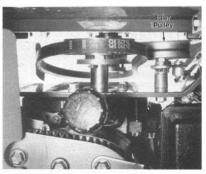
Remove the belt cover held in place by two bolts and locknuts. The lower pulley and drive belt are behind it.
